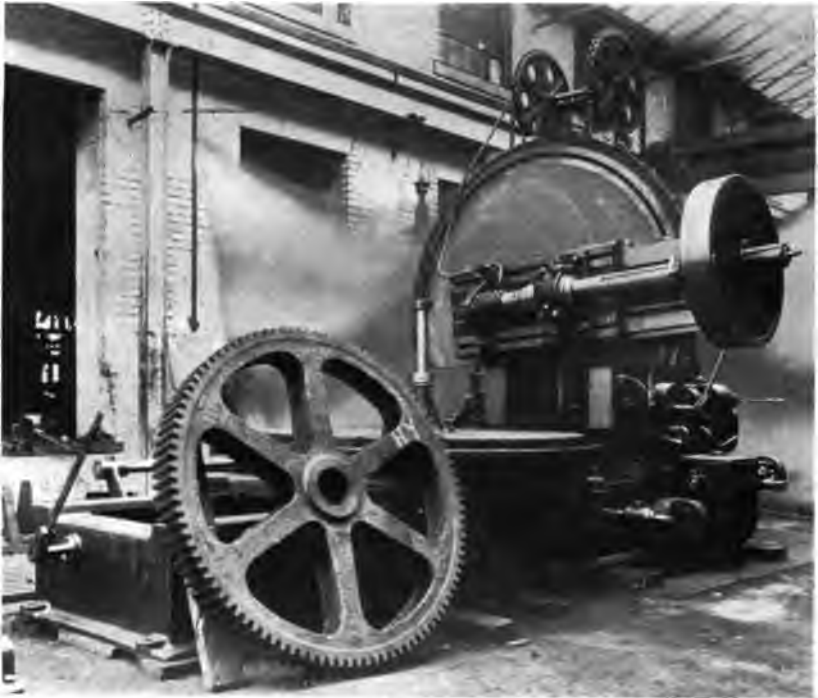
Gear-Hobbing Machine. (Reinecker.) 1894.
